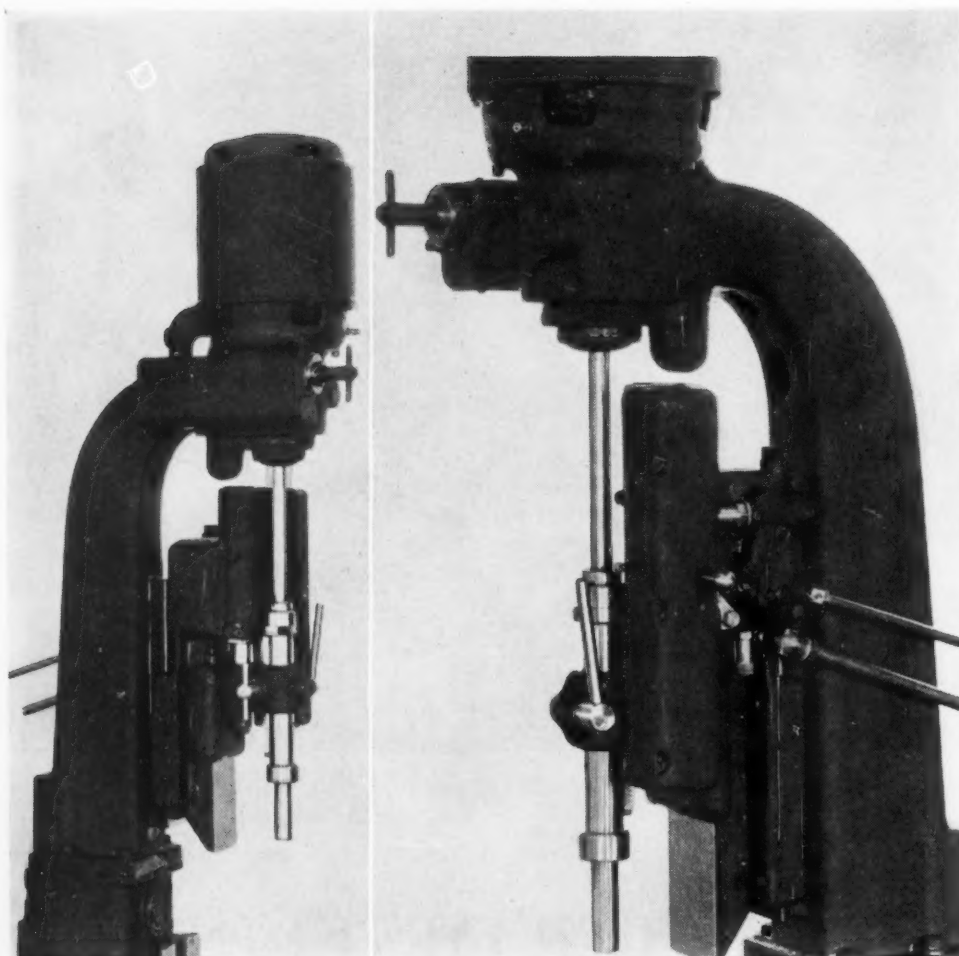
TWO VIEWS OF STEP-DRILLING UNIT MOUNTED ON THE FRAME OF A STANDARD DRILLING MACHINE
